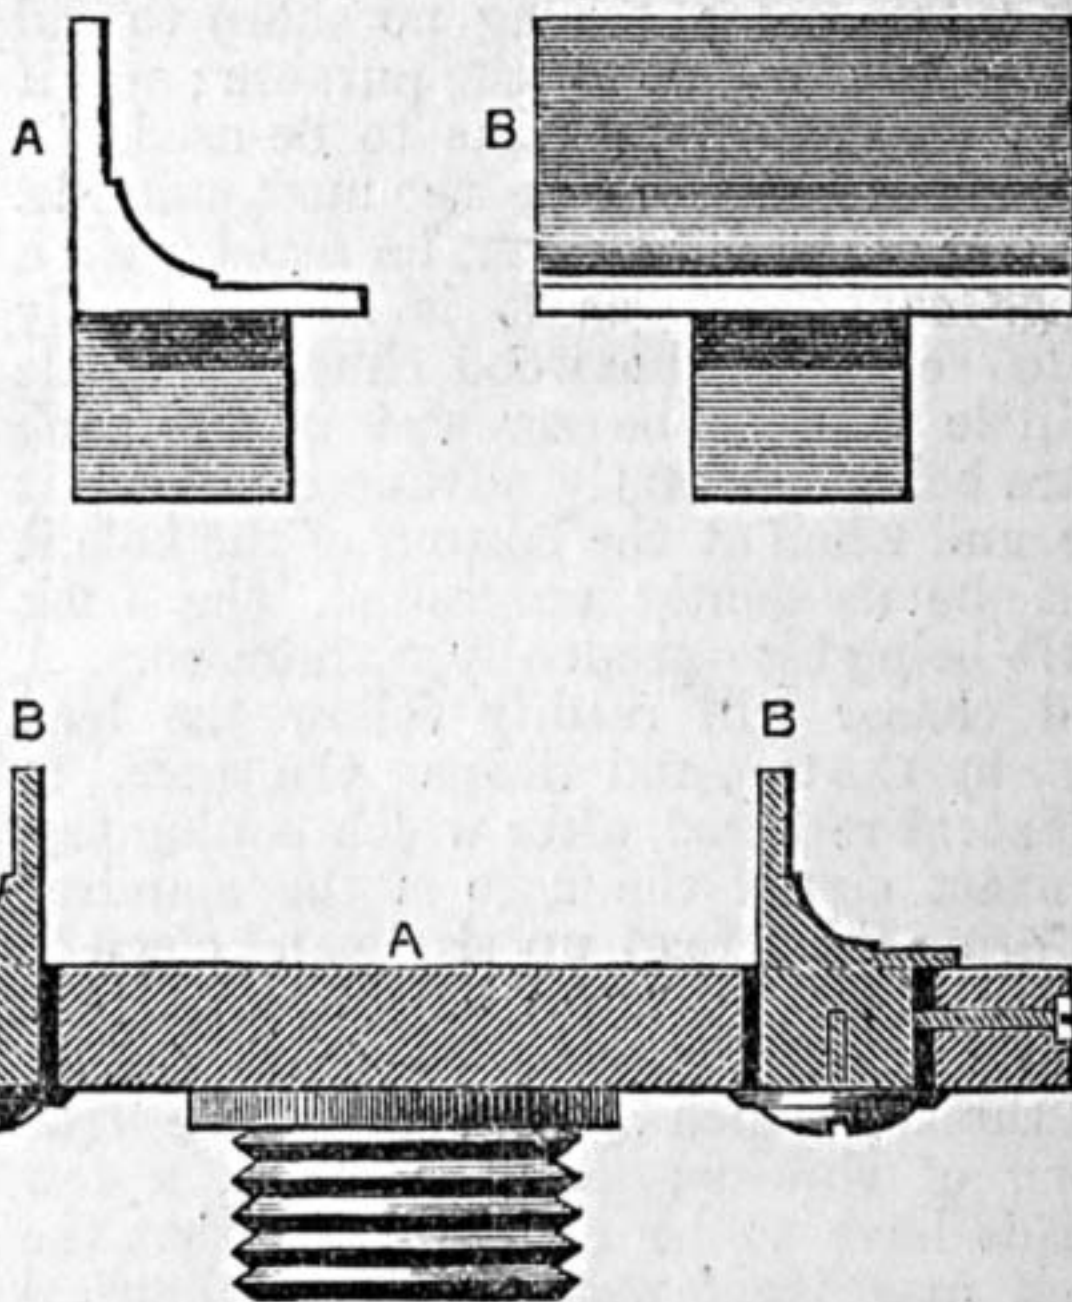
Sectional View of Sliding Plate—A, Plate; B, Pallets, showing Tenons and Small Adjusting Screw.
